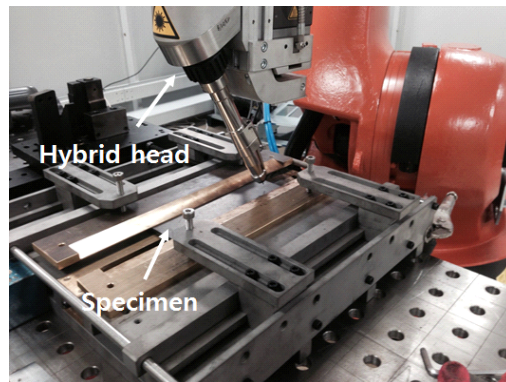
Set up of laser-MIG arc hybrid welding system
